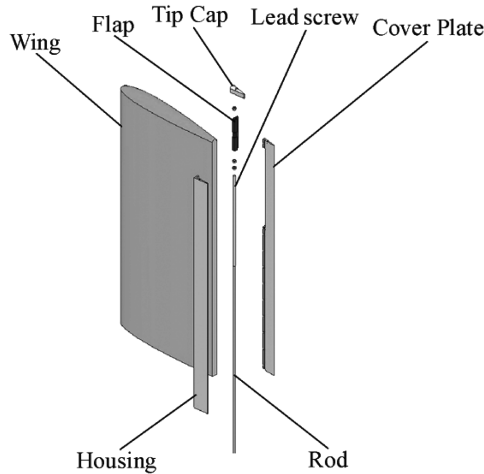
An exploded CAD rendering of the wing and spanwise actuating Gurney flap.
